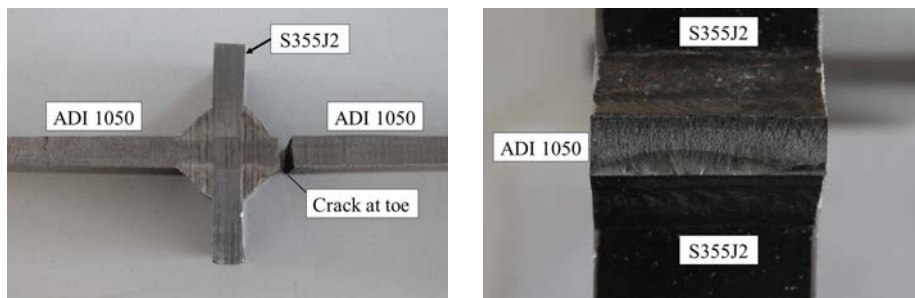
Fracture surfaces of cruciform non-load-carrying fillet-welded joints: specimen C18-2,as welded, 4PB loading, $R=0.5$, $\Delta\sigma = 190MPa$, $N_f = 179361cycles$
